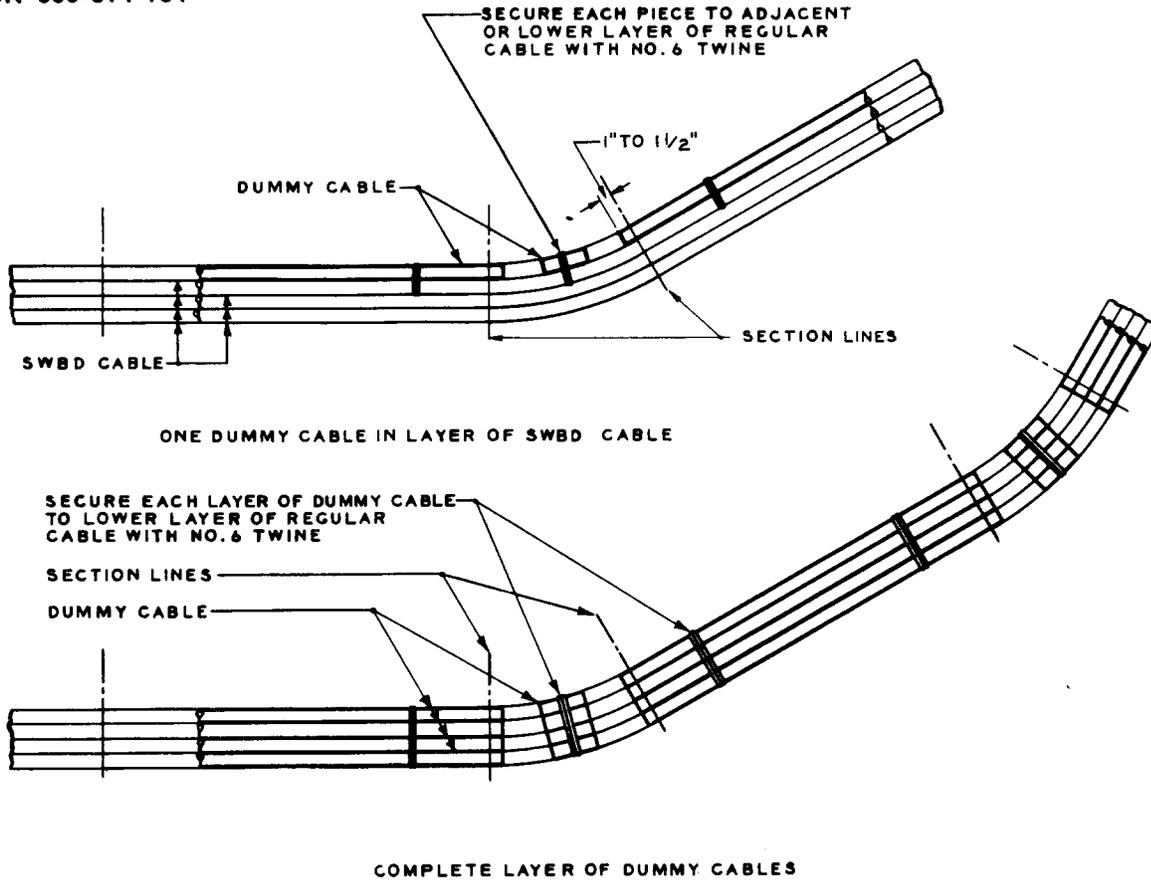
Method of Using Flat-type Nonmetallic Dummy Cables in Angle Sections
